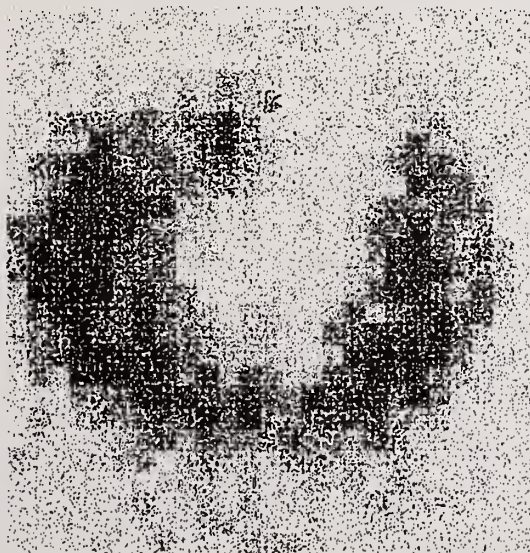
Resonance neutron radiograph of silver solder joint. The defect in the solder is clearly visible.
